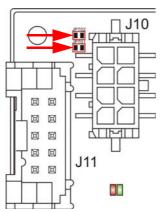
Controller PCB – Solder Pads (JP701 & JP702
